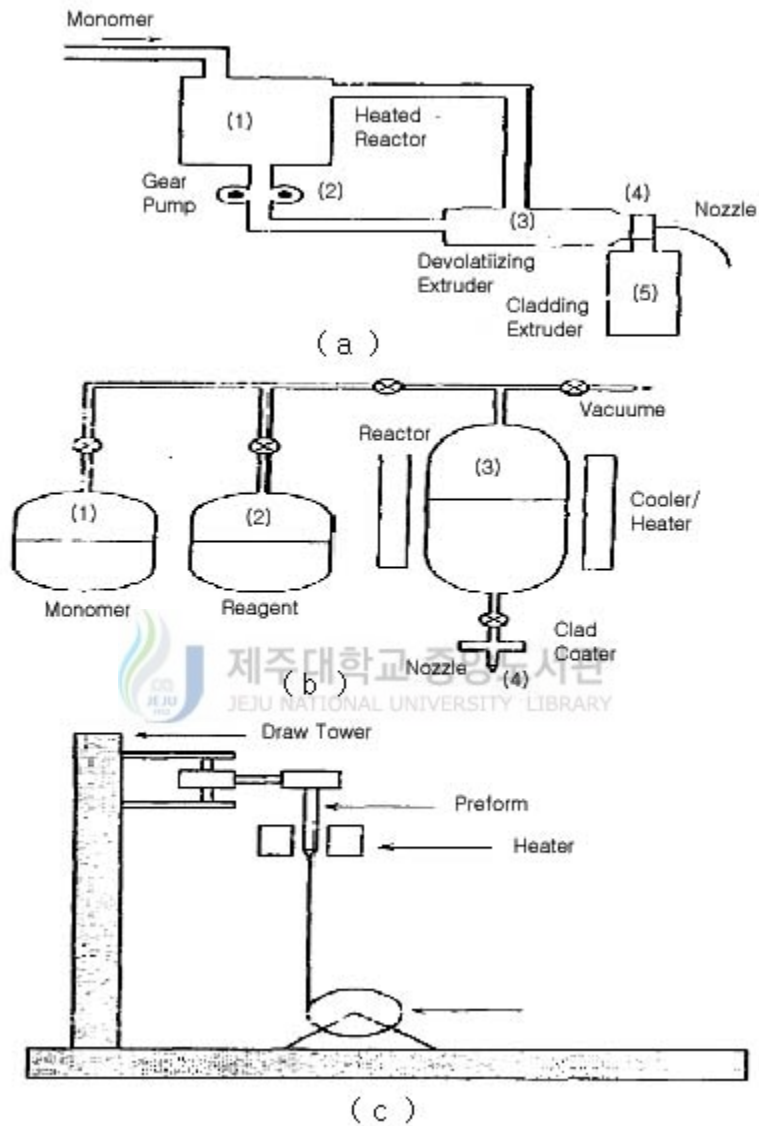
The manufacturing technique of POE : (a) Continuous extrusion, (b) Batch extrusion (c) Preform drawing.
